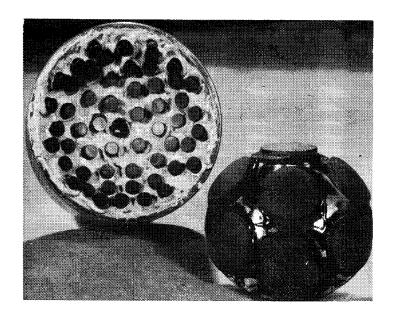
Spot Block Shown to the Right of the Hemispherical Grinding Tool
